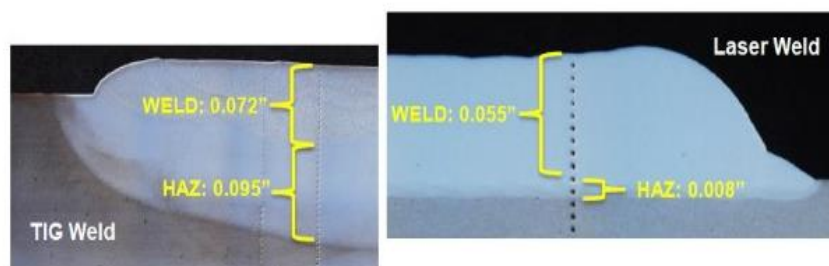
Heat-affected zone (HAZ) of TIG and Laser welding (<https://www.moldmakingtechnology.com/articles/a-better-process-for-welding-repair-of-molds>).
